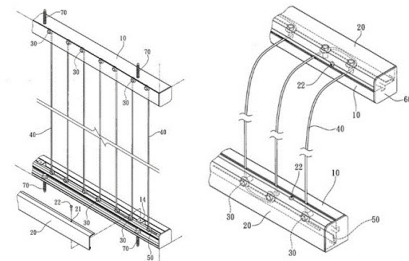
Invisible Iron Window with Anti-Detachment Cable Track (Source: Patent Holder)
